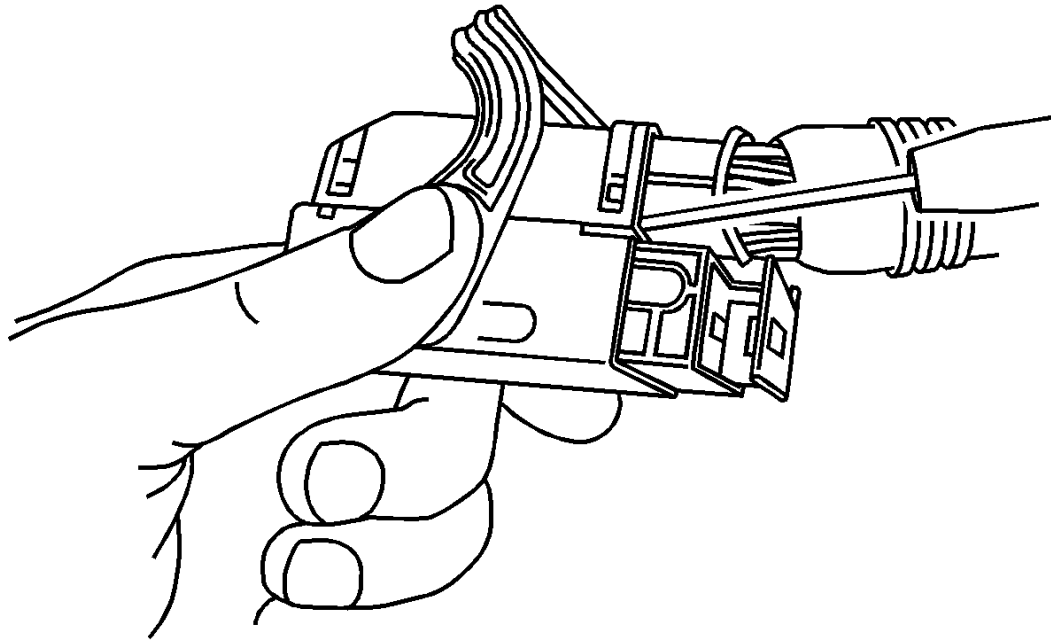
View Of Flat-Bladed Tool Being Inserted Between Cover & Connector Body
